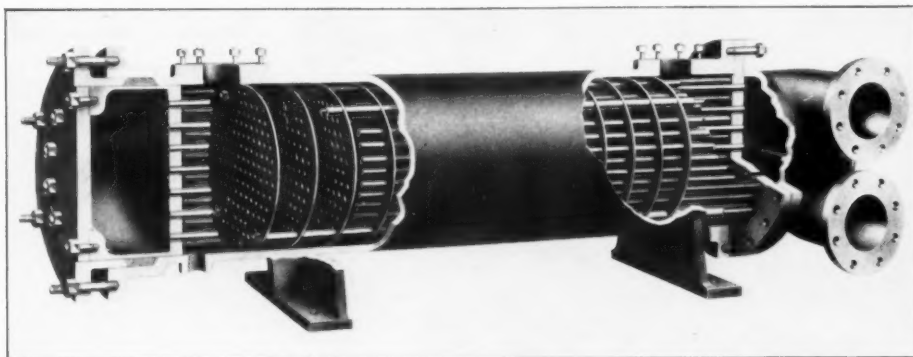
The Grisco-Russell style TM multiwhirl heat exchanger for cooling lubricating oil from turbine bearings, etc. Hot oil is continuously circulated through the shell under pressure, being brought into intimate contact with the cooling surface by baffles. Cooling water is passed through the tubes in one or two passes.
